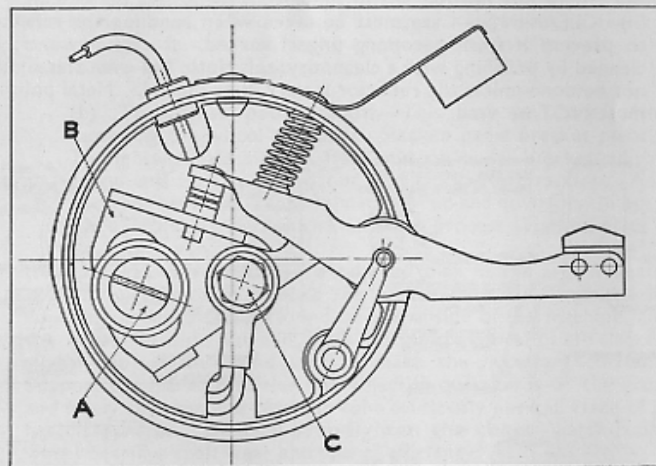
CONTACT-BREAKER ASSEMBLY
